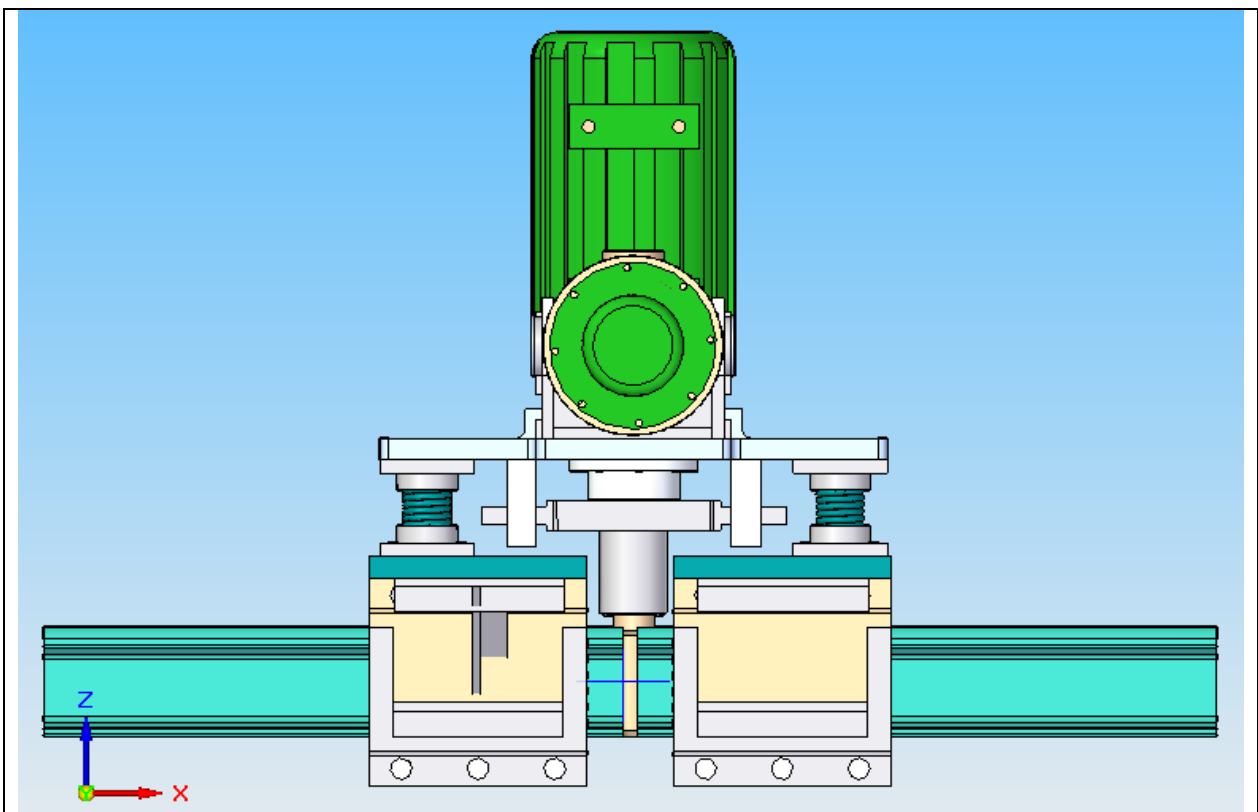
Front view of proposed friction stir welding machine
